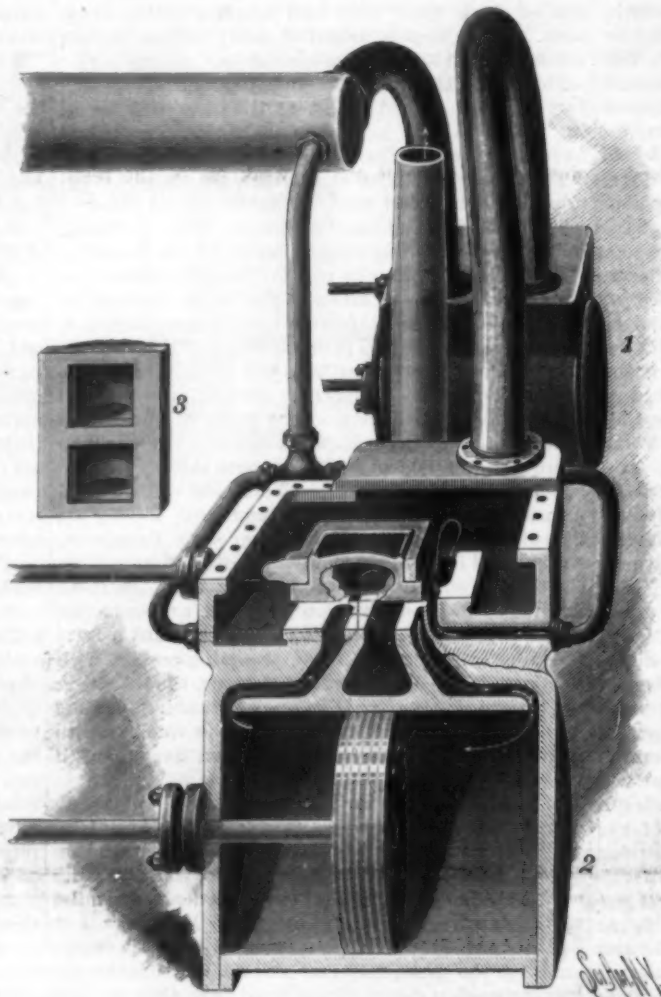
LONGITUDINAL SECTION THROUGH VALVE CHEST AND PORTS, LOW PRESSURE CYLINDER.
